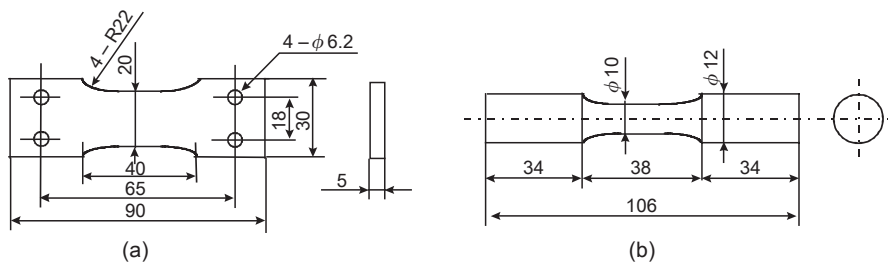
Shape and dimensions of fatigue test specimens (unit : mm)
